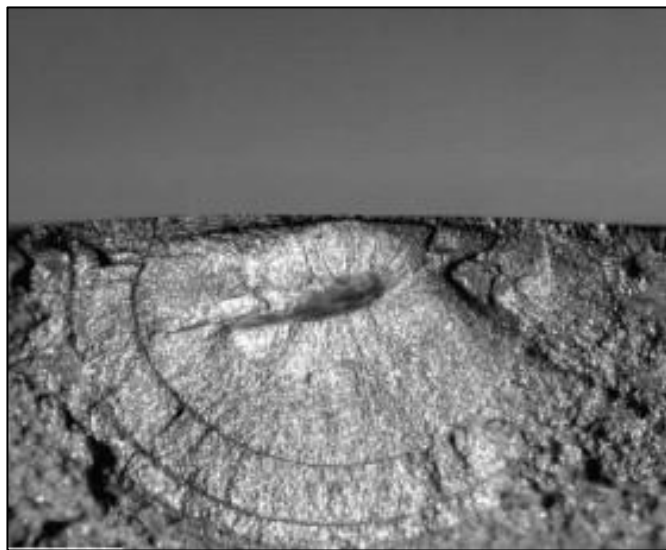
22 Large planar defect on the fracture surface of a weld made in 5083-H321 alloy[91].
